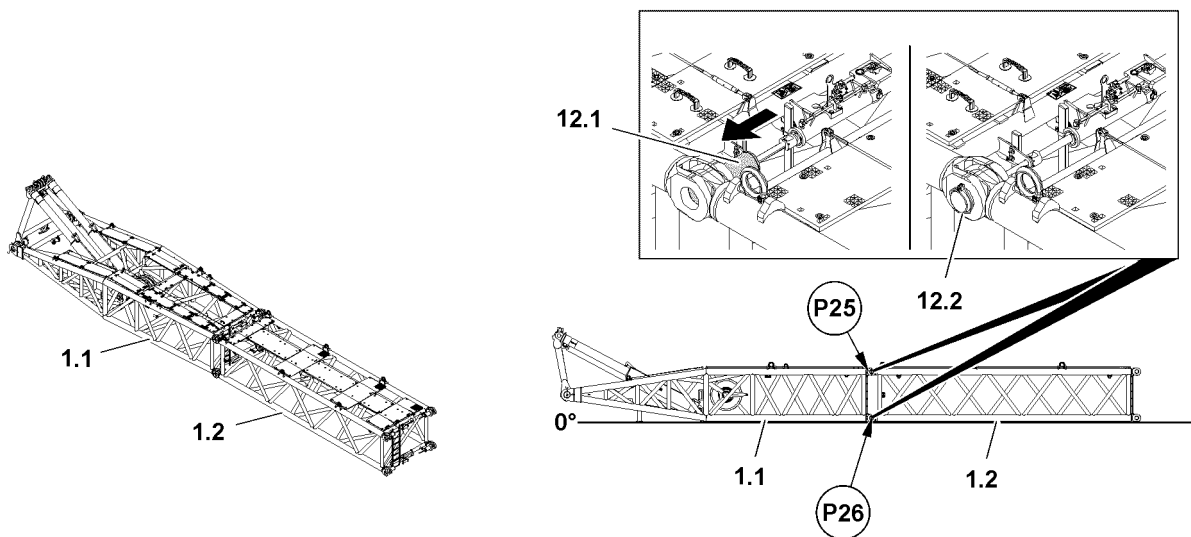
WA-frame preassembly — Assembling the WA-frame intermediate section on the WA-frame pivot section
